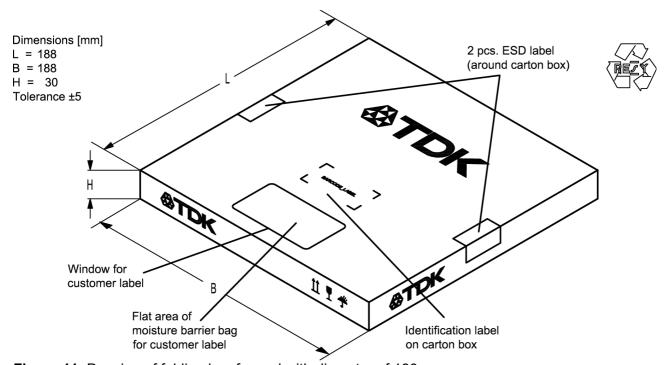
Drawing of folding box for reel with diameter of 180 mm.
